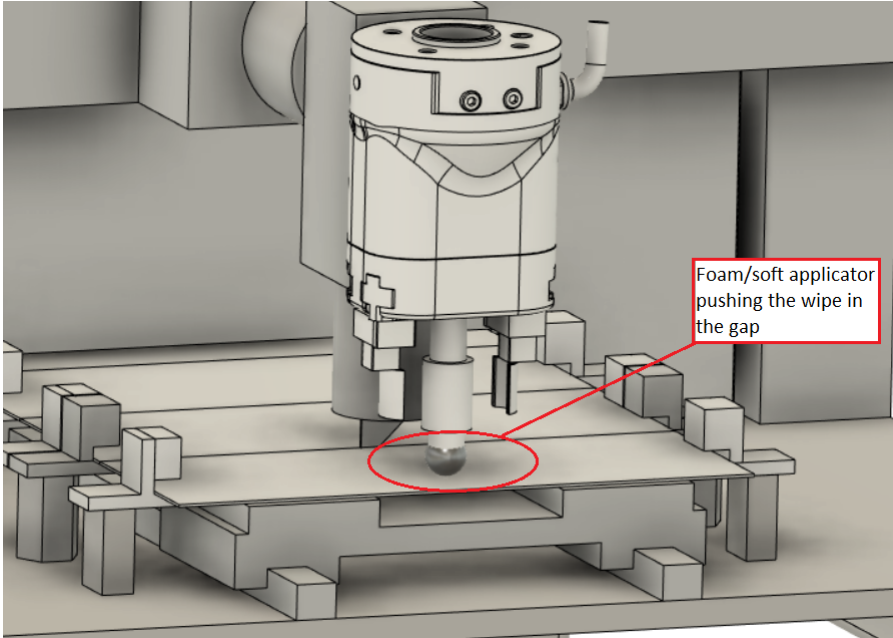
Modified gripper on the wipe pick up platform of the wipes cutting/dispensing machine.
